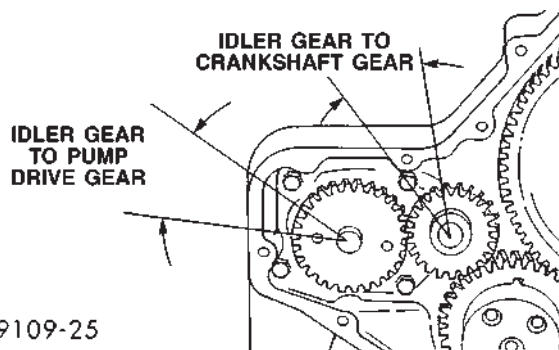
Idler Gear to Pump Drive Gear and Crankshaft Gear Backlash
